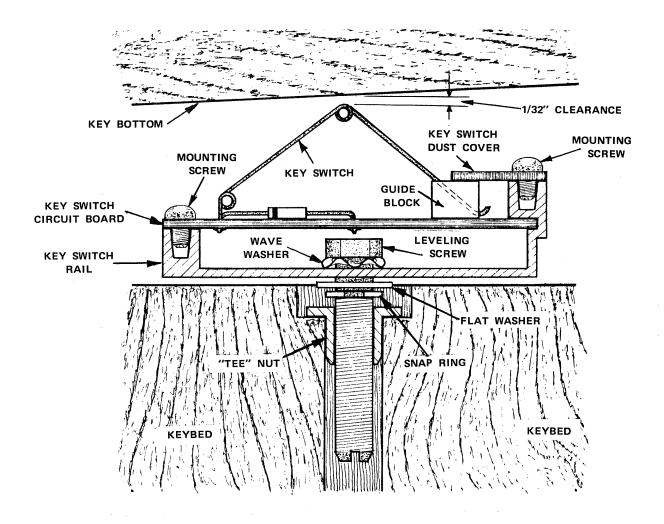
Cross-section of Key Switch Rail and keybed.
